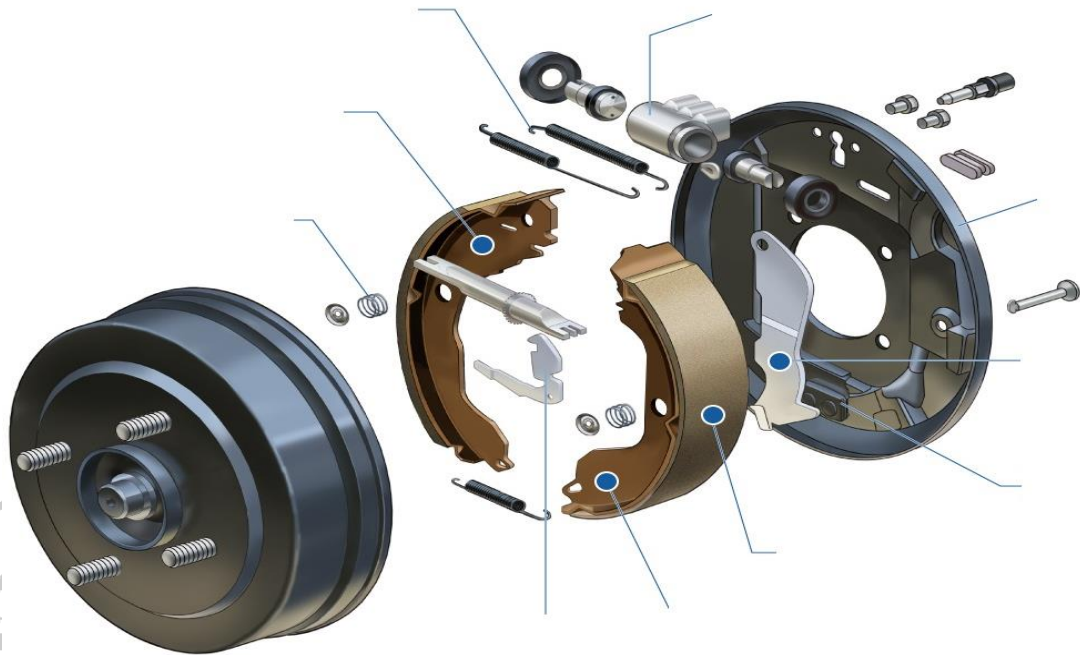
Drum Brake (Identify the components of the drum brake)
